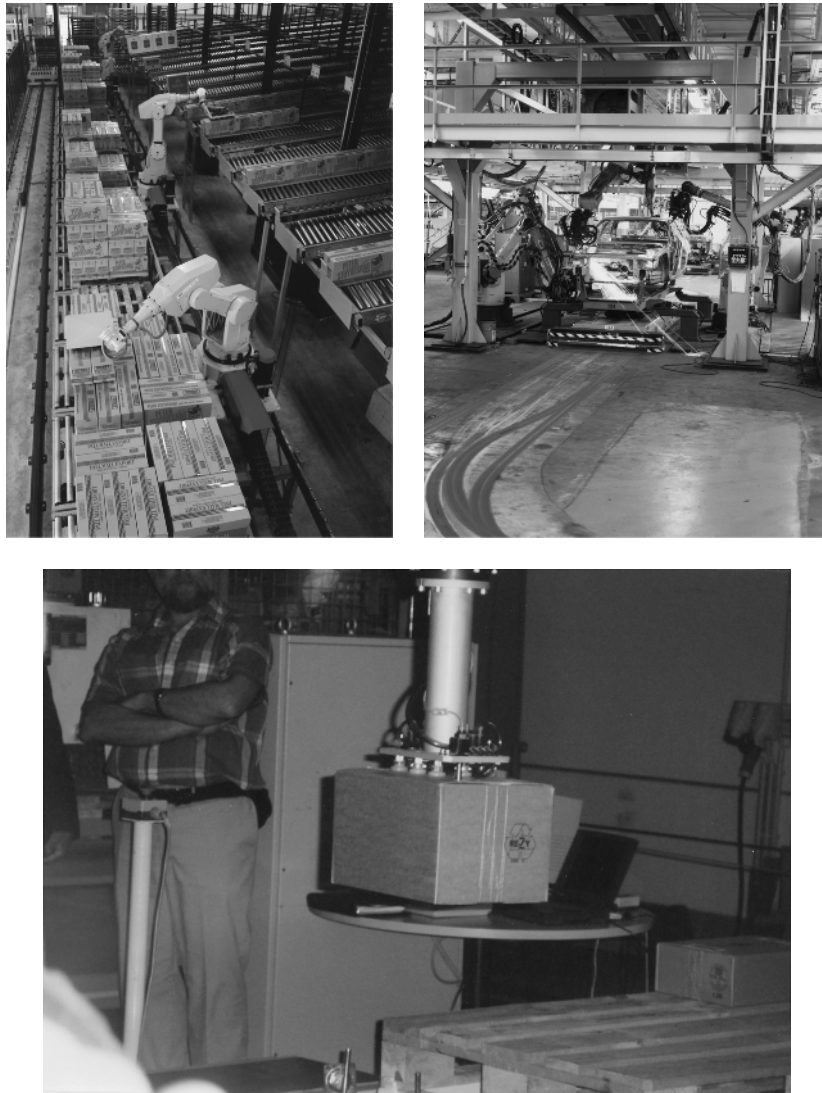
Use of robots in pick and place and welding operations (Source: Courtesy of Vanderlande Industries, Gould Communications, and Fraunhofer Institute, IML-Dortmund)
